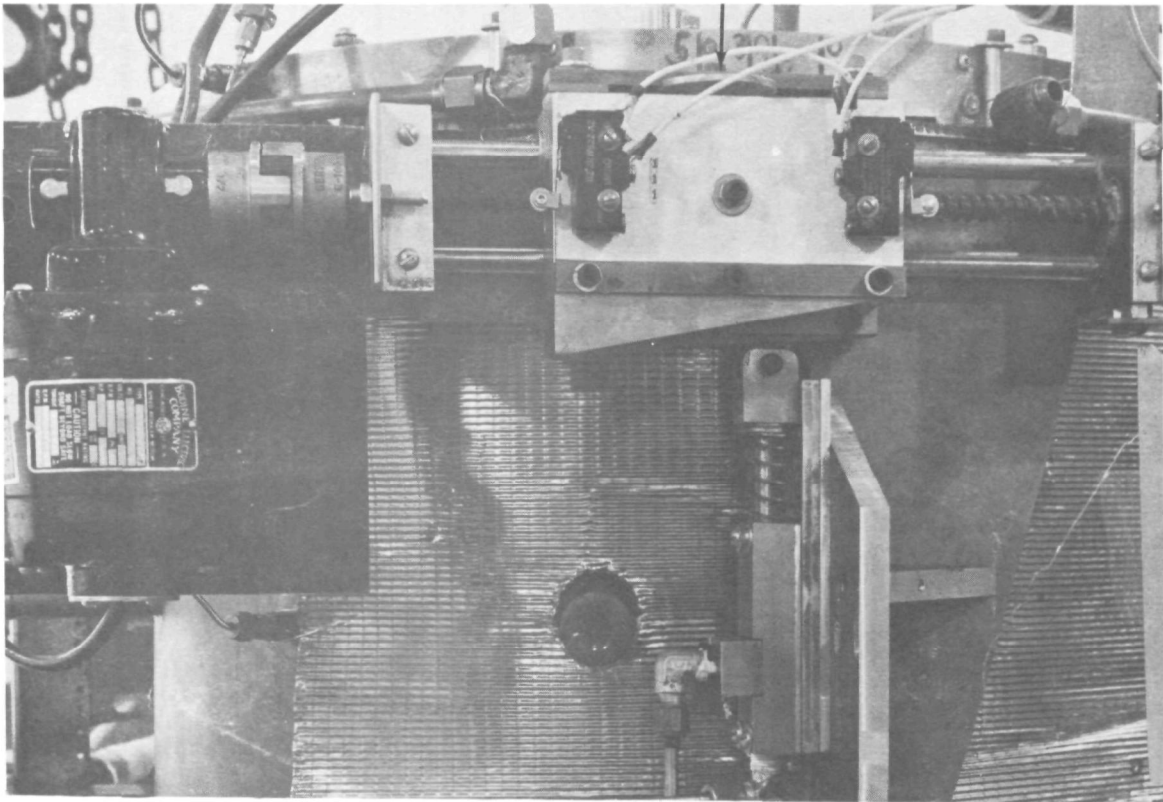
TRIPLE VALVE ACTUATOR SHOWING AIR VALVE ACTUATION TAB
